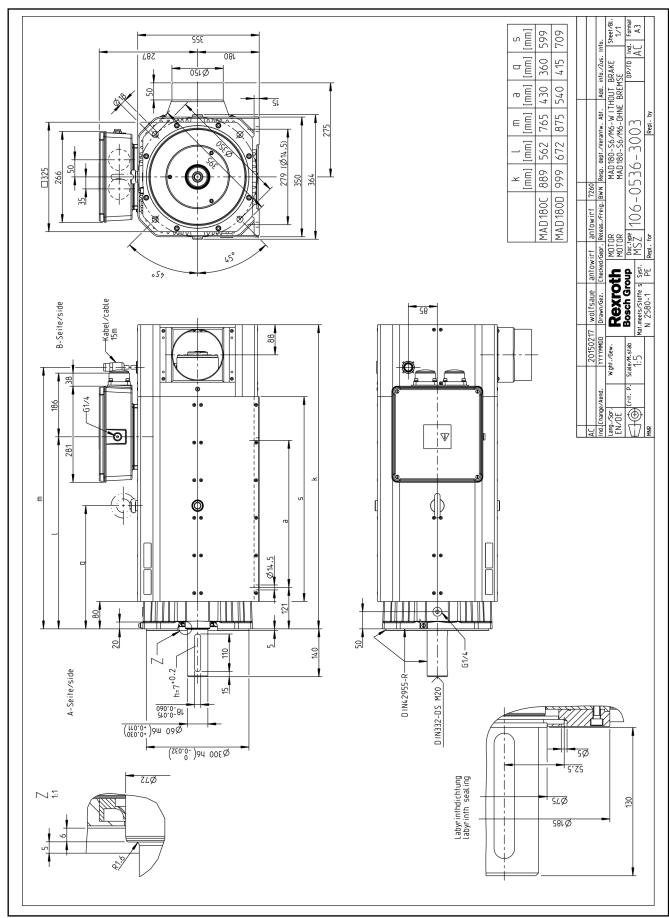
MAD180 with encoder M6/S6, without brake
